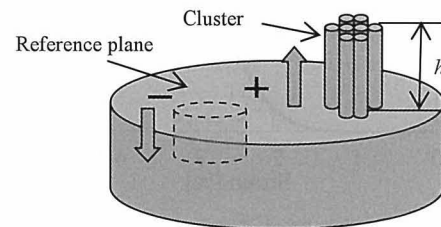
Schematic of fracture surface for unidirectional composite.
